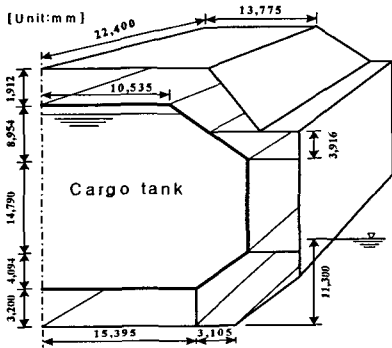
Cross sectional dimensions of 1/4 cargo tank
